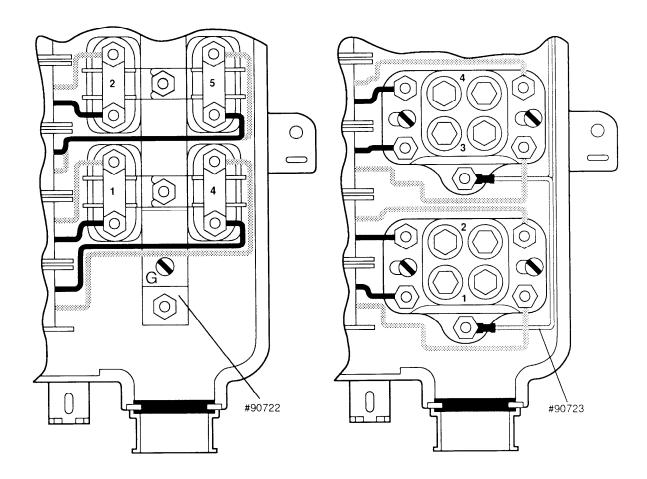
SNI-4600 showing 125 style mounting configuration (using Ground Jumper Bus Bracket Kit #90722) and 128 style mounting configuration (using Ground Jumper Wire Kit #90723).
